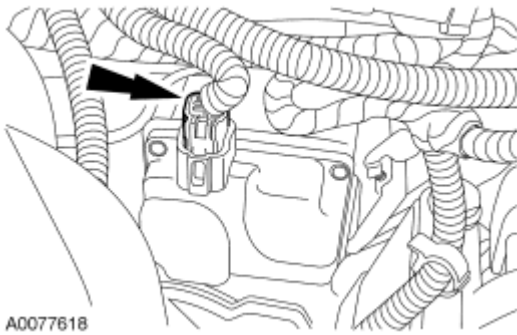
Locating Intake Manifold Runner Control Electrical Connector
